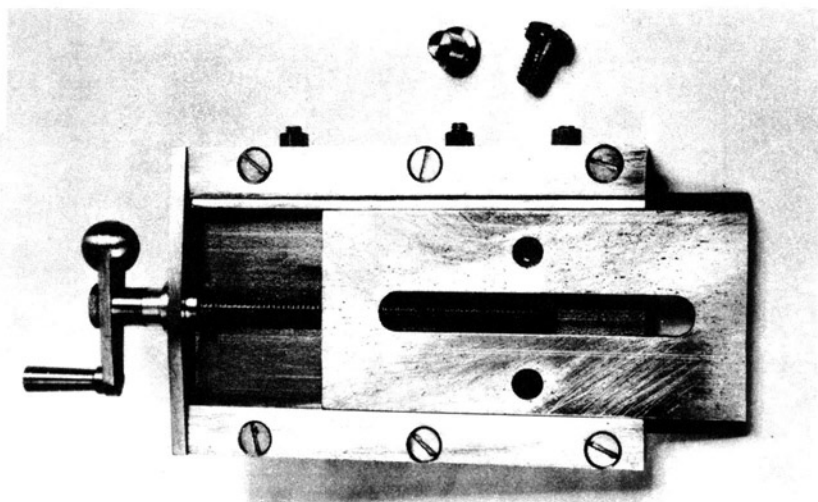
Assembly of the completed cross slide, seen from underneath.
